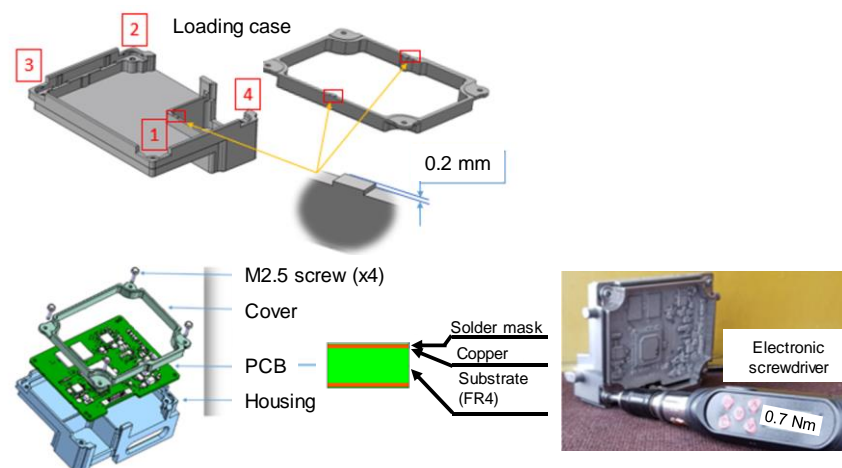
The PCB assembly between housing and cover. The electronic screwdriver for tightening the assembly.
